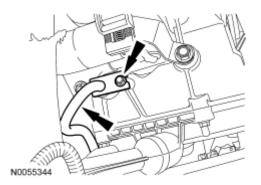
Identifying Transmission Fluid Cooler Tube Bolt Courtesy of FORD MOTOR CO.
